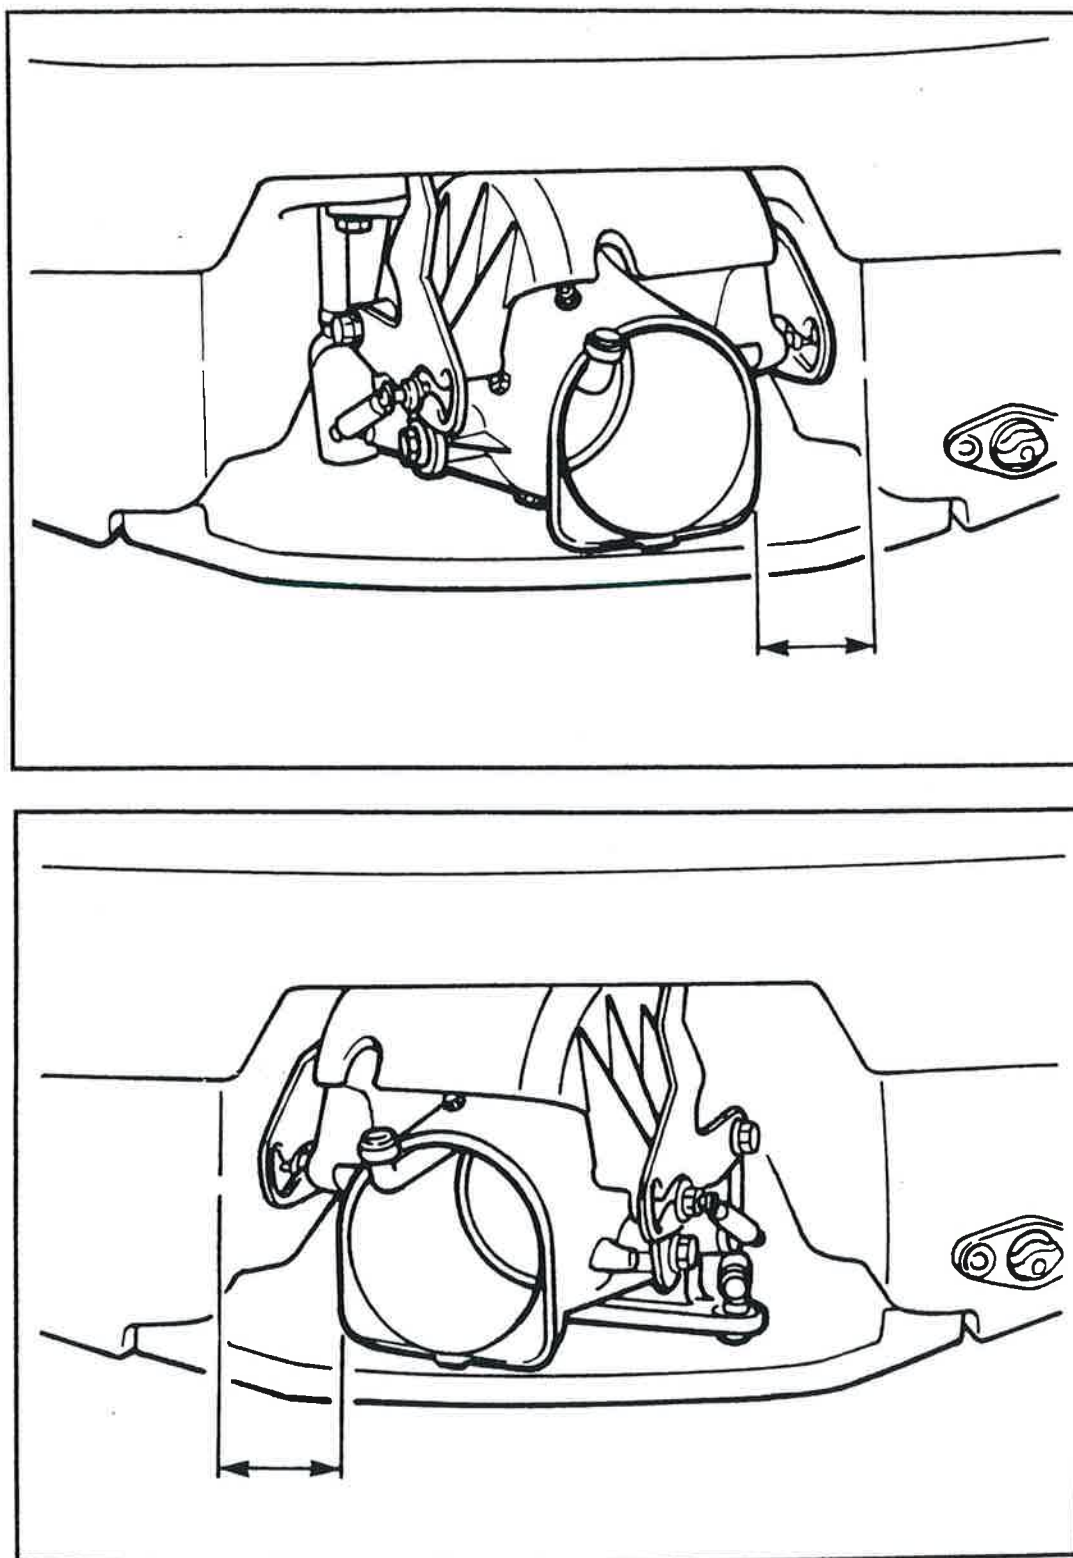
Showing nozzle clearance dimensions (Should be even)
